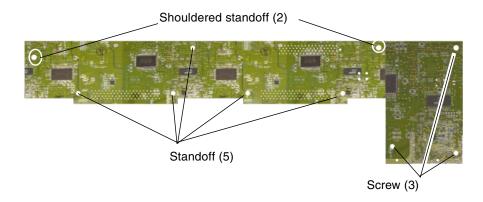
Lower Interface Board Standoff and Screw Locations
